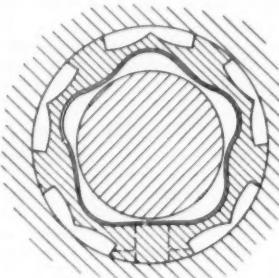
In this diagram of the Micro Clearance bearing, the deformation of the bearing bore is shown exaggerated to illustrate the principle of operation
